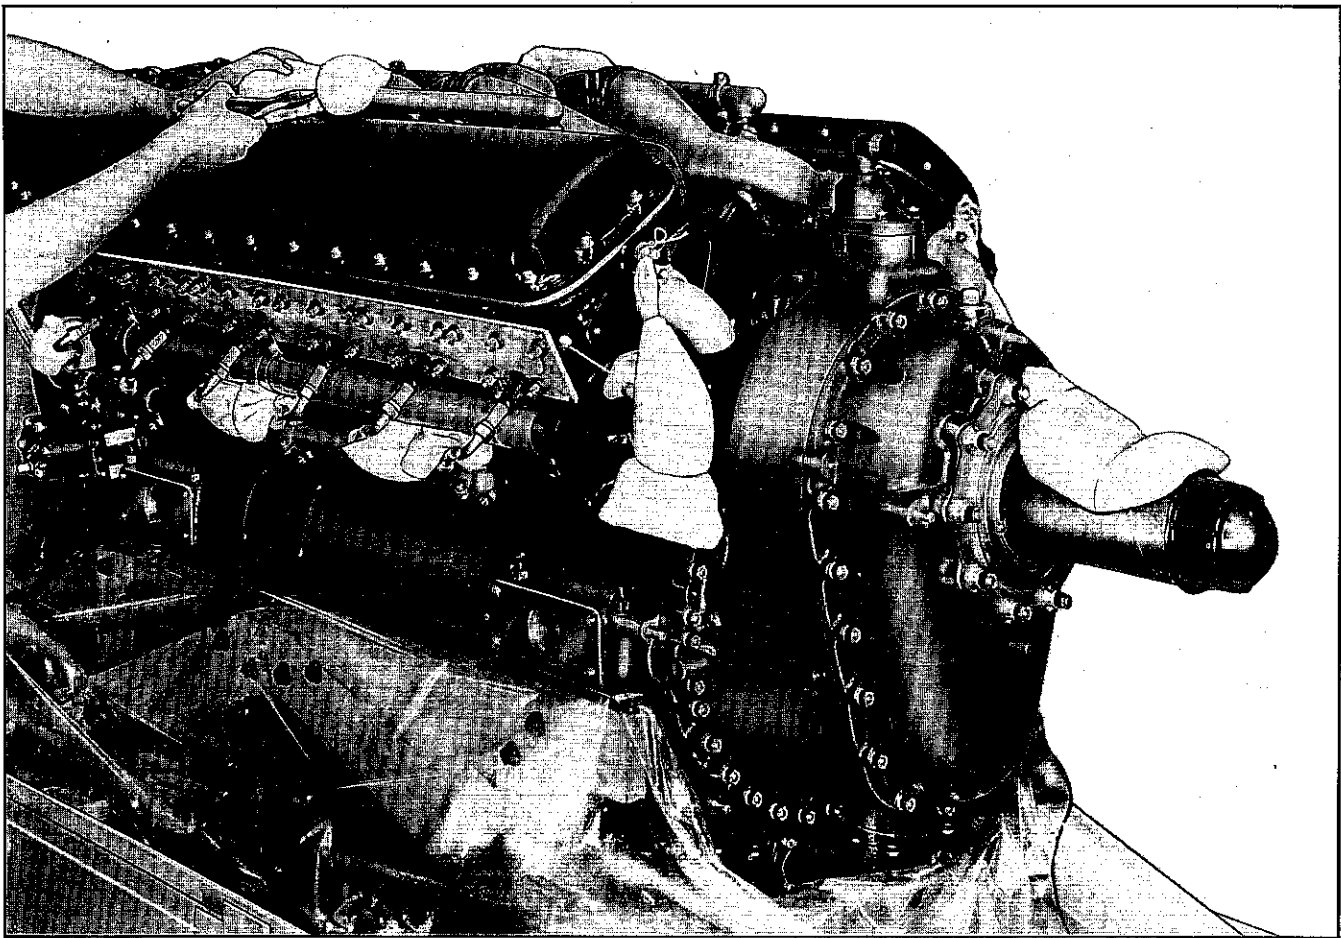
Attaching Silica Gel Bags to Engine Immediately Before Sealing.
